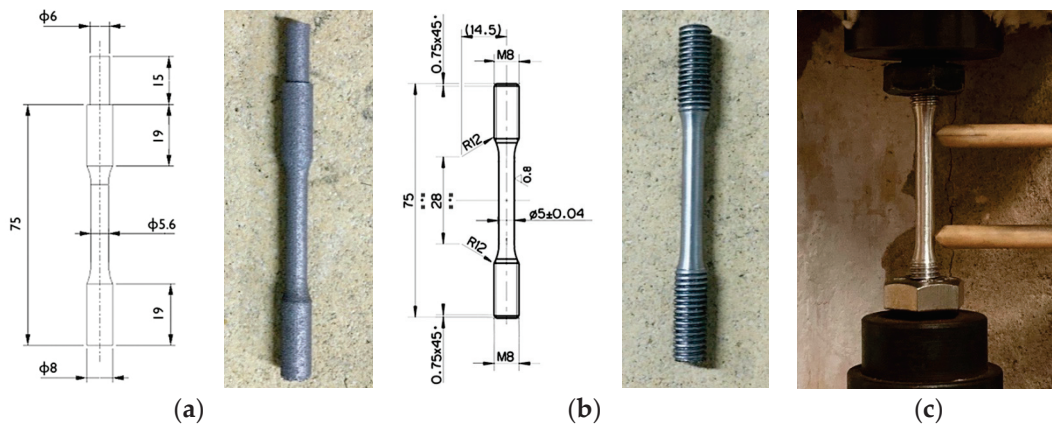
Tensile samples geometry and dimensions: (a) near-net-shape sample obtained by PBF-LB process, (b) final sample after machining. In (c): equipment for tensile tests.
